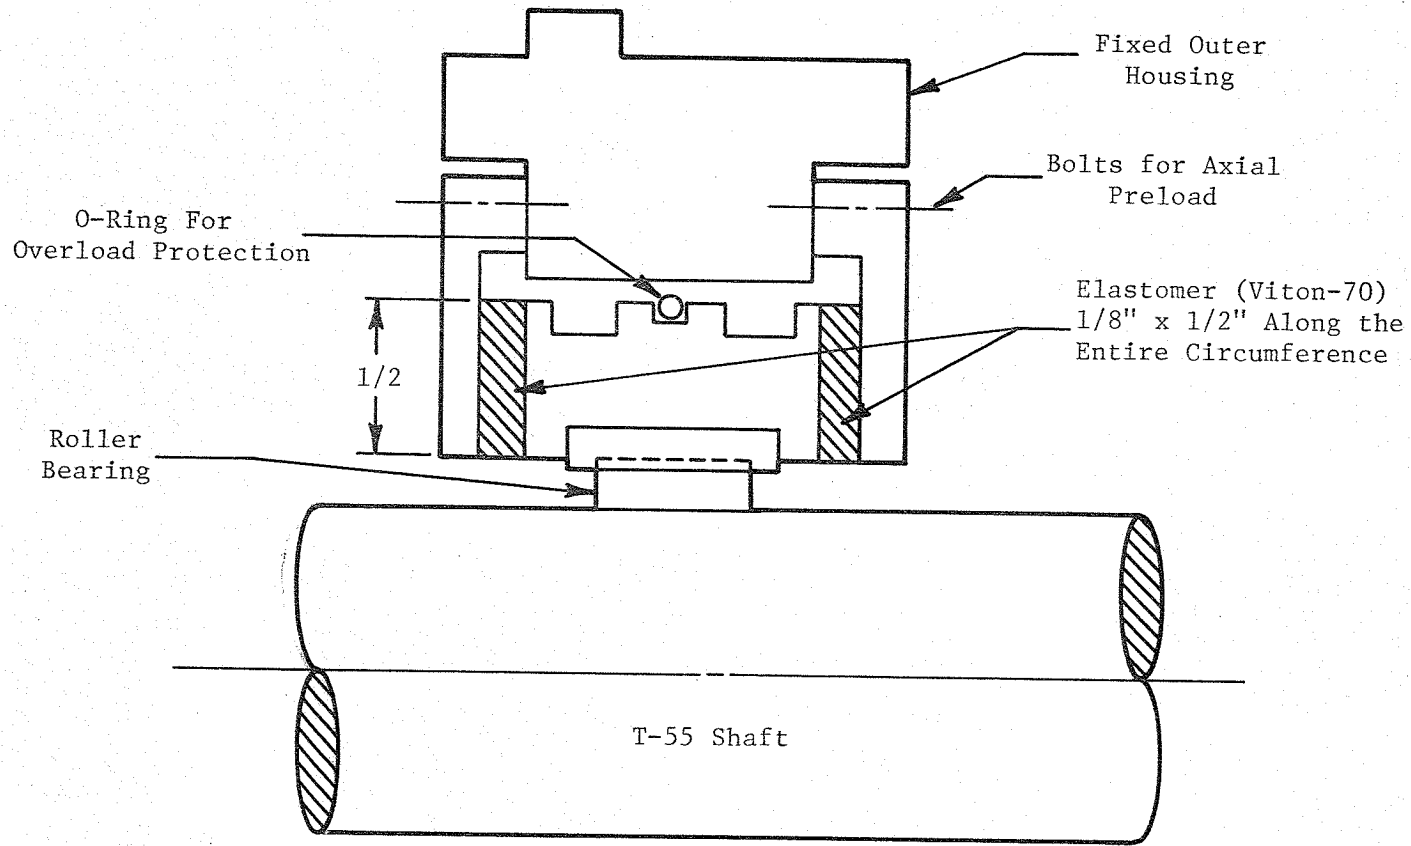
T-55 Elastomer Supported Roller Bearing Cartridge
